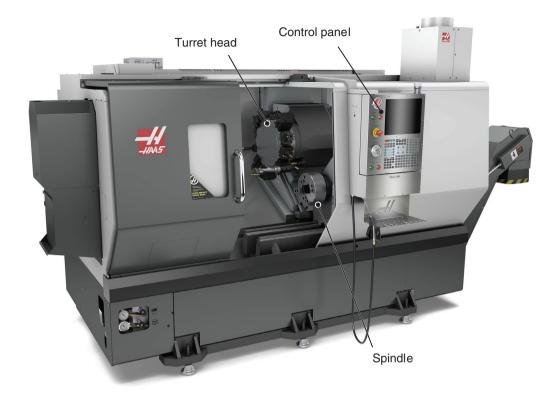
The Haas DS-30Y, a computer numerical-controlled turning center. The two spindle heads and tool-driven turret head make the machine very flexible in its machining capabilities. Source: Courtesy of Haas Automation, Inc
